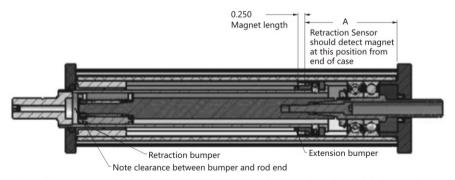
Actuator Shown in maximum recommended retracted position, with 10mm of 19 clearance on forward impact bumper
